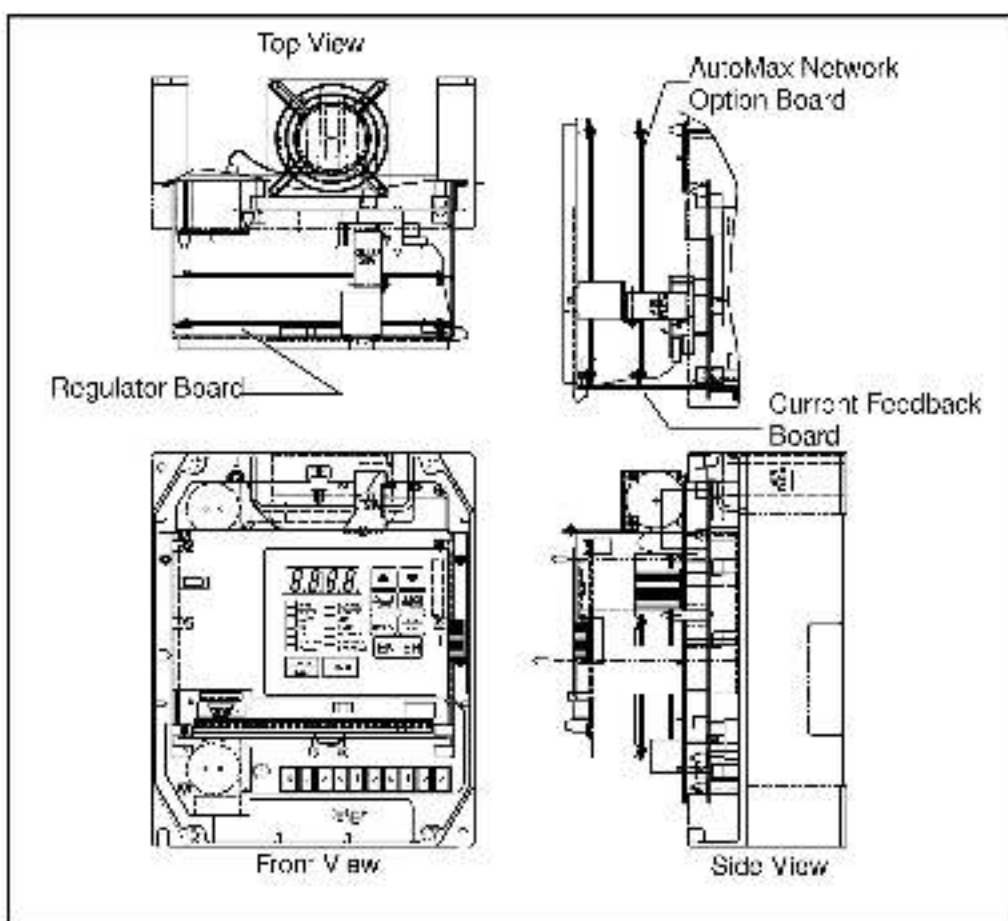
GV300/SE @ 480V GV300/SE Drive
